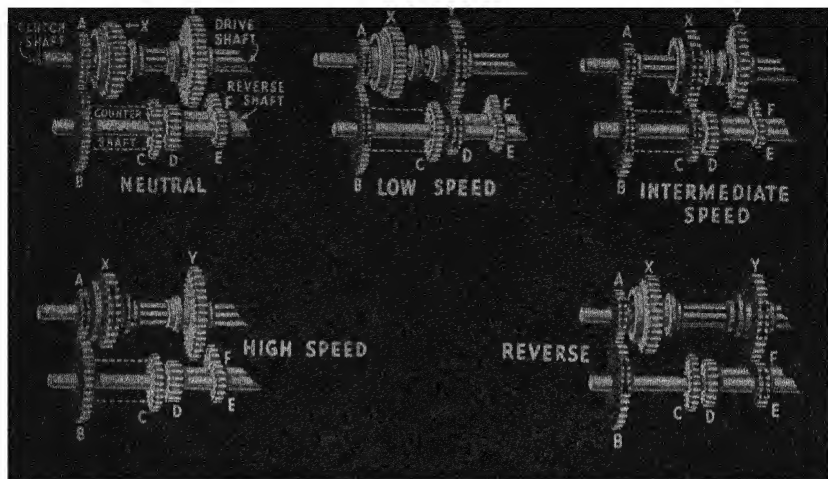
See if you can explain this drawing of the gear shifts. The letters have been put on the gears to help you explain what happens.
